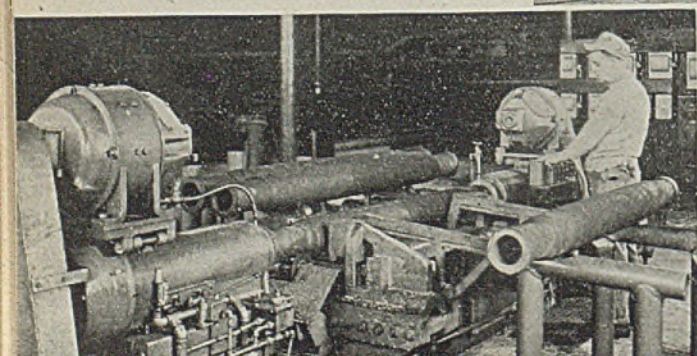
(Left)—Axles are machined to exact centers in the final operation
